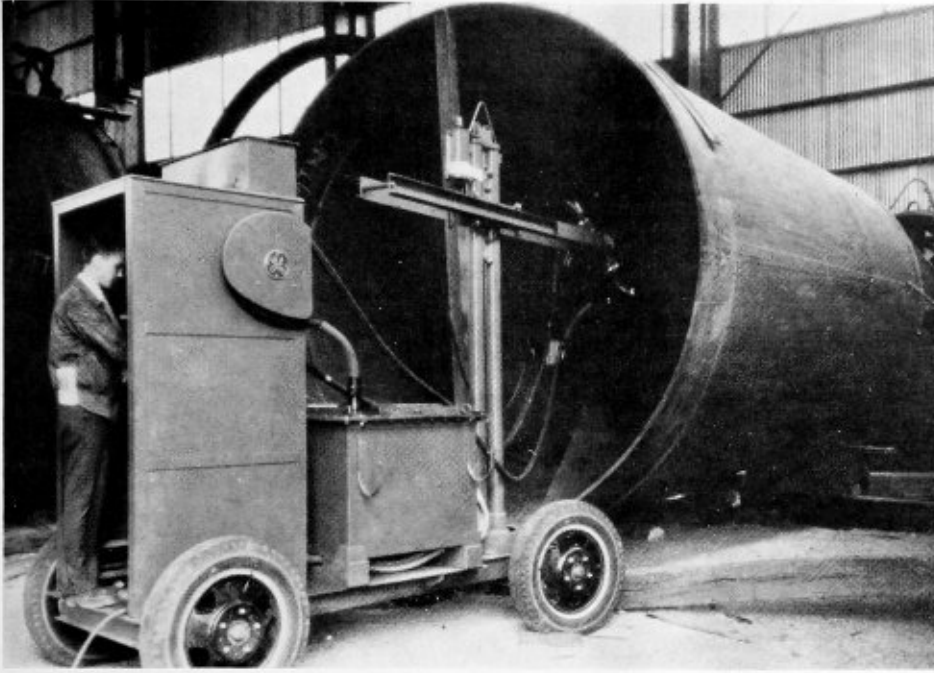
Portable X-ray equipment with truck mountings makes possible the ready examination of welded vessels in the field erecting shop
